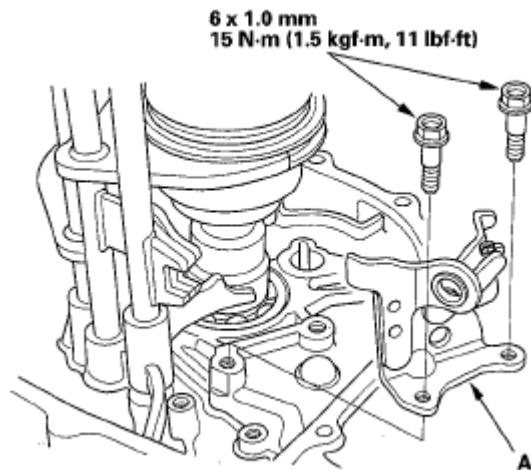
Identifying Reverse Shift Fork With Torque Specification
